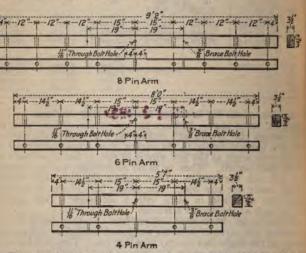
Cross-arm dimensions recommended by the N. E. L. A.
